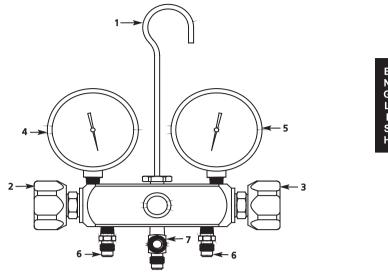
Repair Parts Illustration for Manifold Gauge Sets
